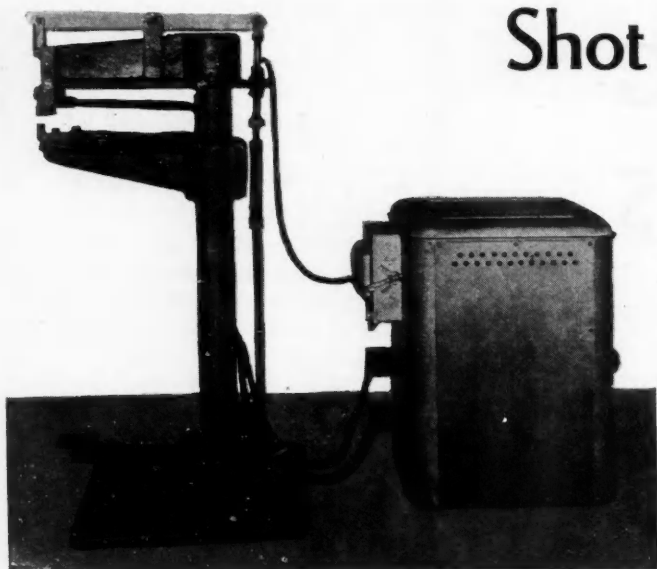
Shot-welding machine developed by E. G. Budd. The cabinet at the right contains the control mechanism and the automatic recorder. By means of power cables the cabinet is connected to hand tongs or a fixed welding head
